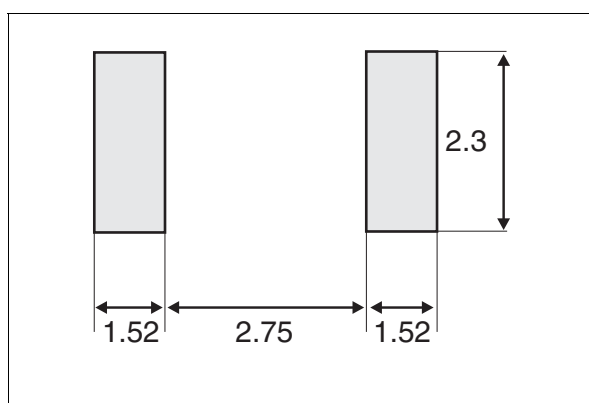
SMB Package Mechanical DataFigure 19: SMB Foot Print Dimensions
